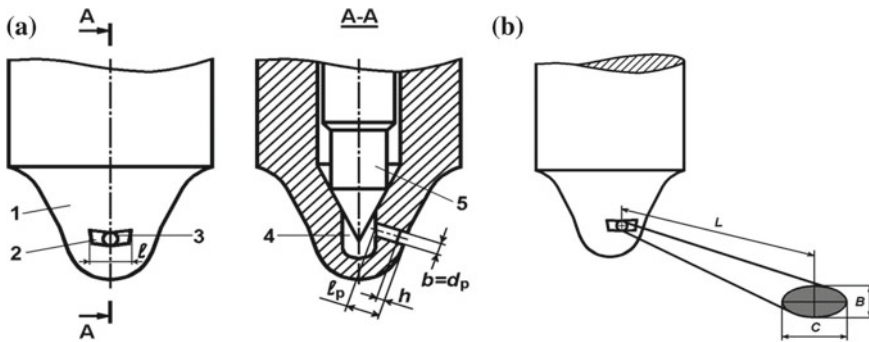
Scheme of the injector nozzle with the grooves made on the nozzle tip, the output cross section of the spray jet (a) and geometry of the fuel jet formed by such spray hole: 1—nozzle tip; 2—groove; 3—spray hole; 4—injected fuel chamber; and 5—needle
